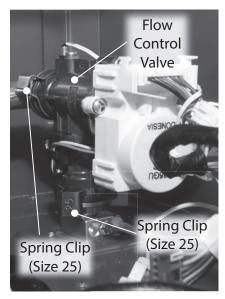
Spring Clips (Size 25), Flow Control Valve (B3)
